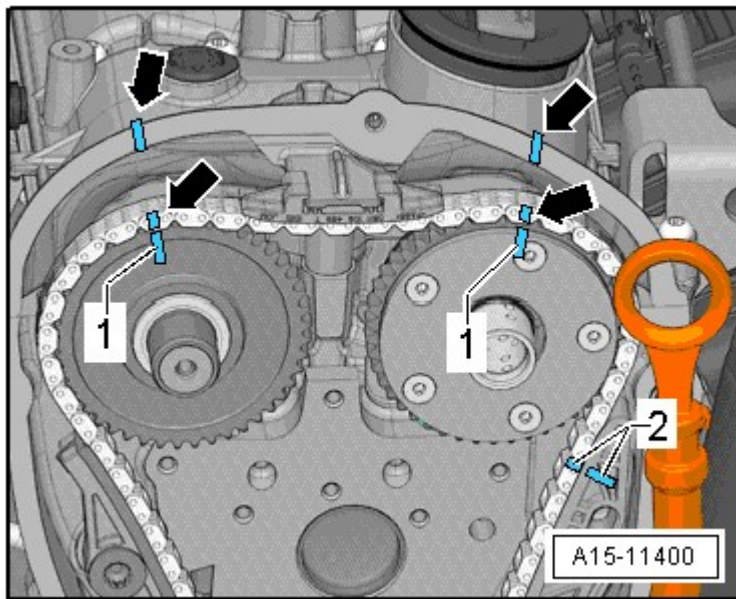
Marking Camshaft Timing Chain And cylinder Head
